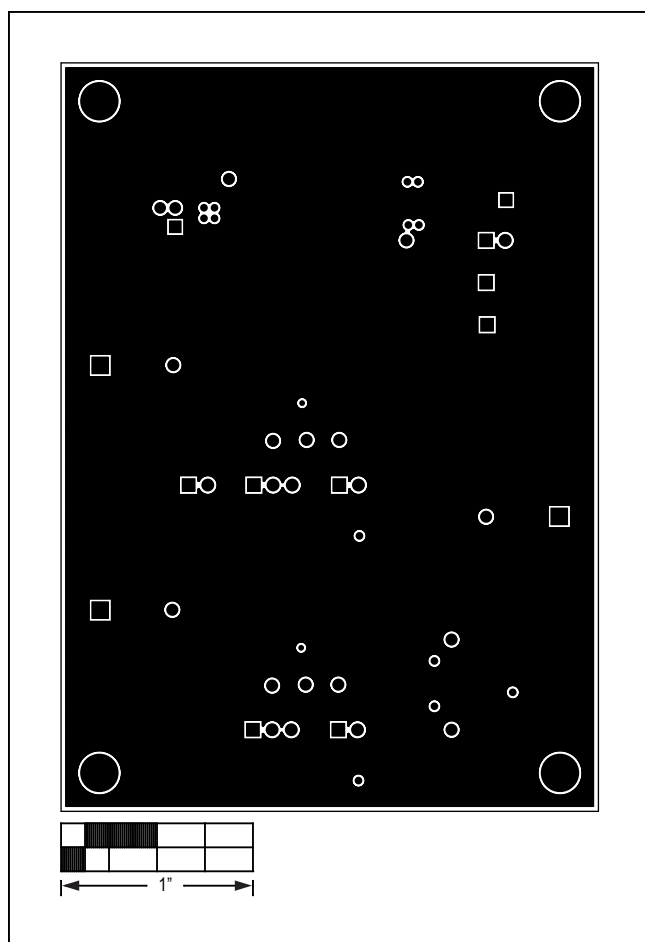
MAX14670 EV Kit PCB Layout—Internal Layer 1
